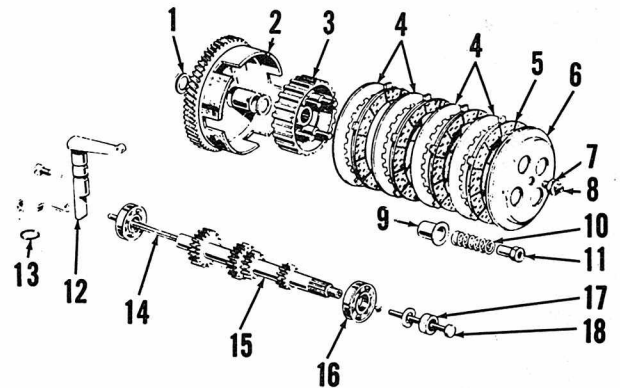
Component parts of clutch assembly and actuating parts.
